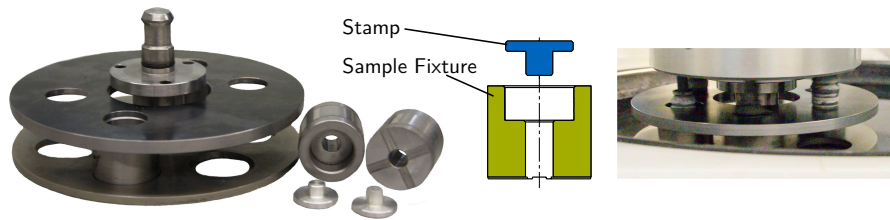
Grinding fixture for shortening the dielectric samples to their 10 mm length.
